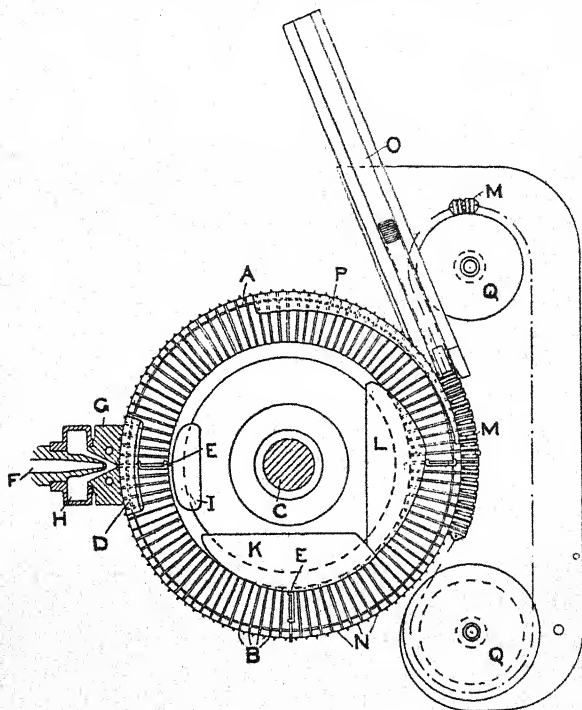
MOULD WHEEL OF THE ROTARY TYPE-CASTER.
